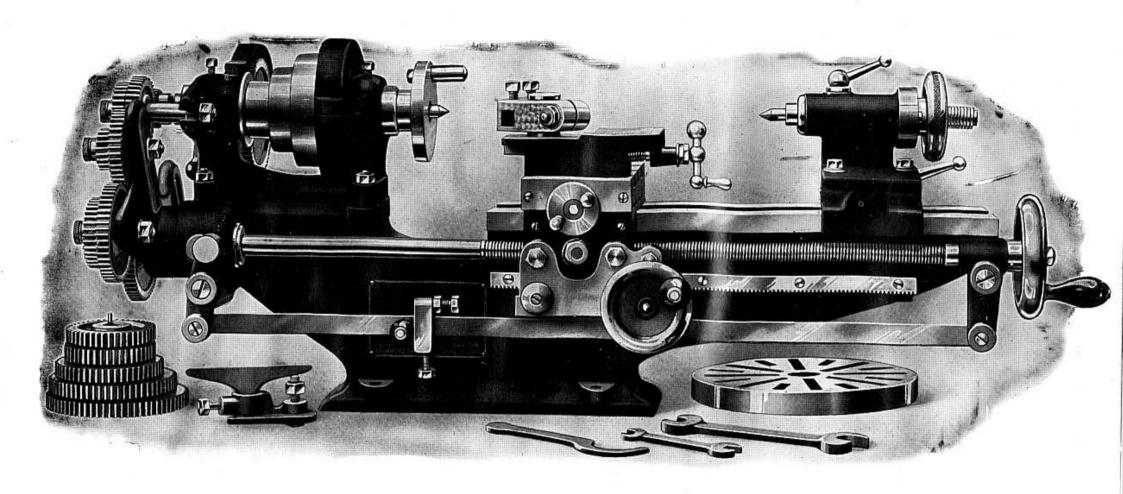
Latest design Drummond 3½-in. Centre Lathe arranged as Bench Machine without driving arrangements.
